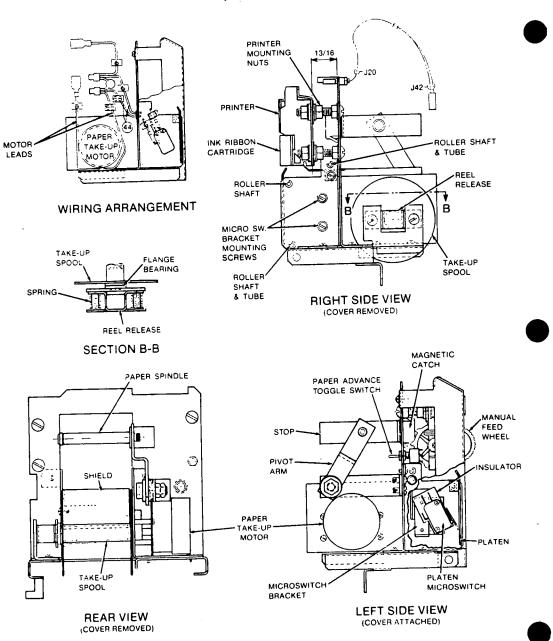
A. PRINTCON PRINTER ASSEMBLY. (Units After 6/85)
